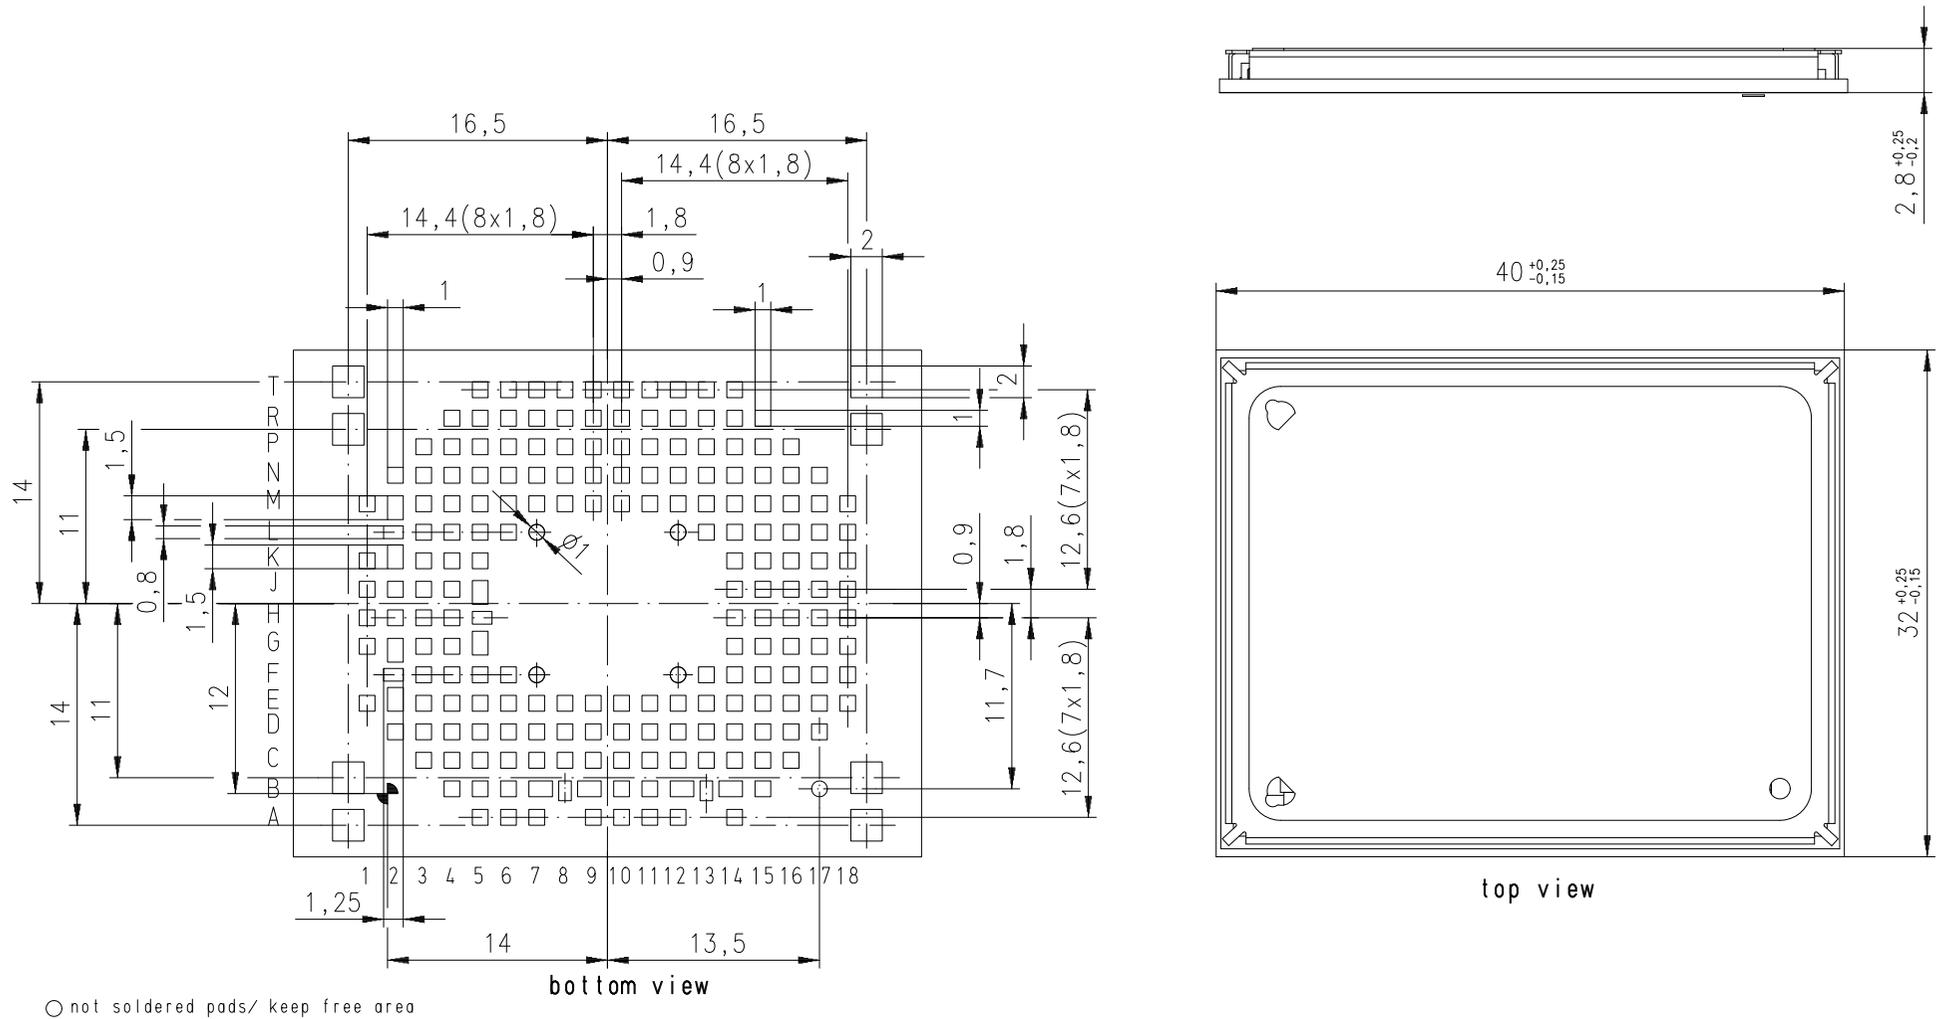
Dimensions of PLAS9-W (all dimensions in mm)
